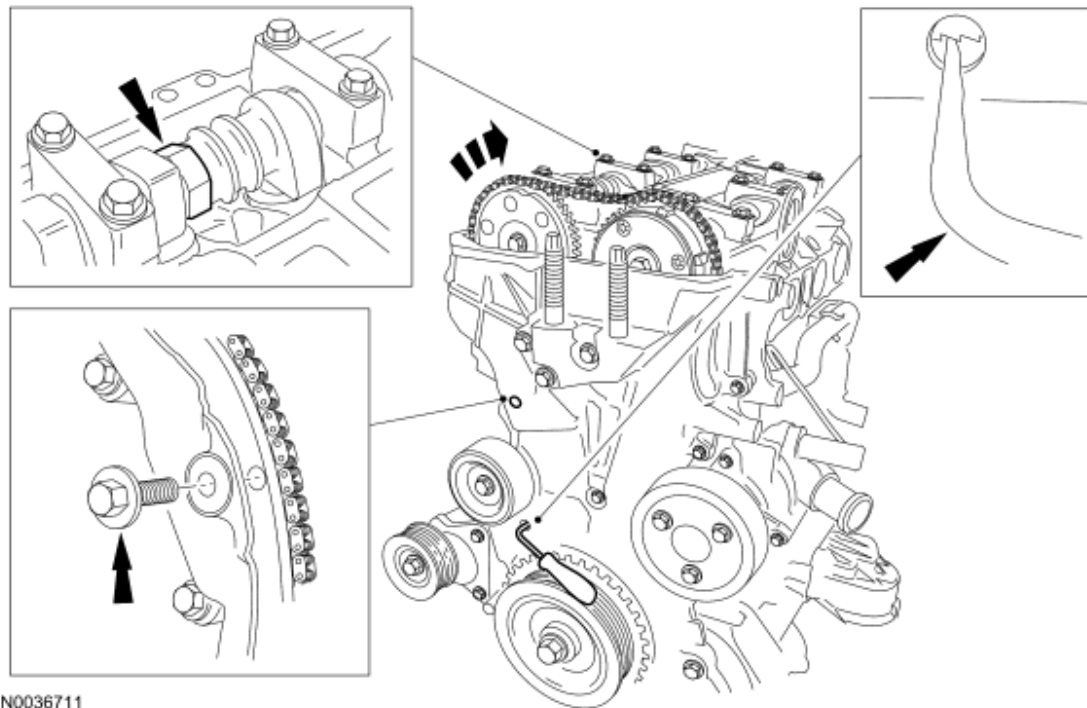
Unlocking Chain Tensioner Ratchet Through Lower Front Cover Timing Hole
